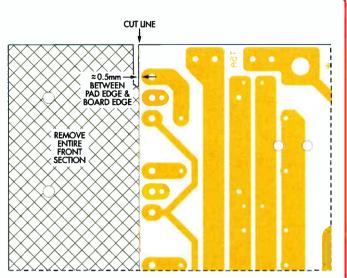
to enable vertical transistor mounting, cut off the entire front section of the PC board as shown here. You do not need to do this for the horizontal mounting style shown in the various photographs!
